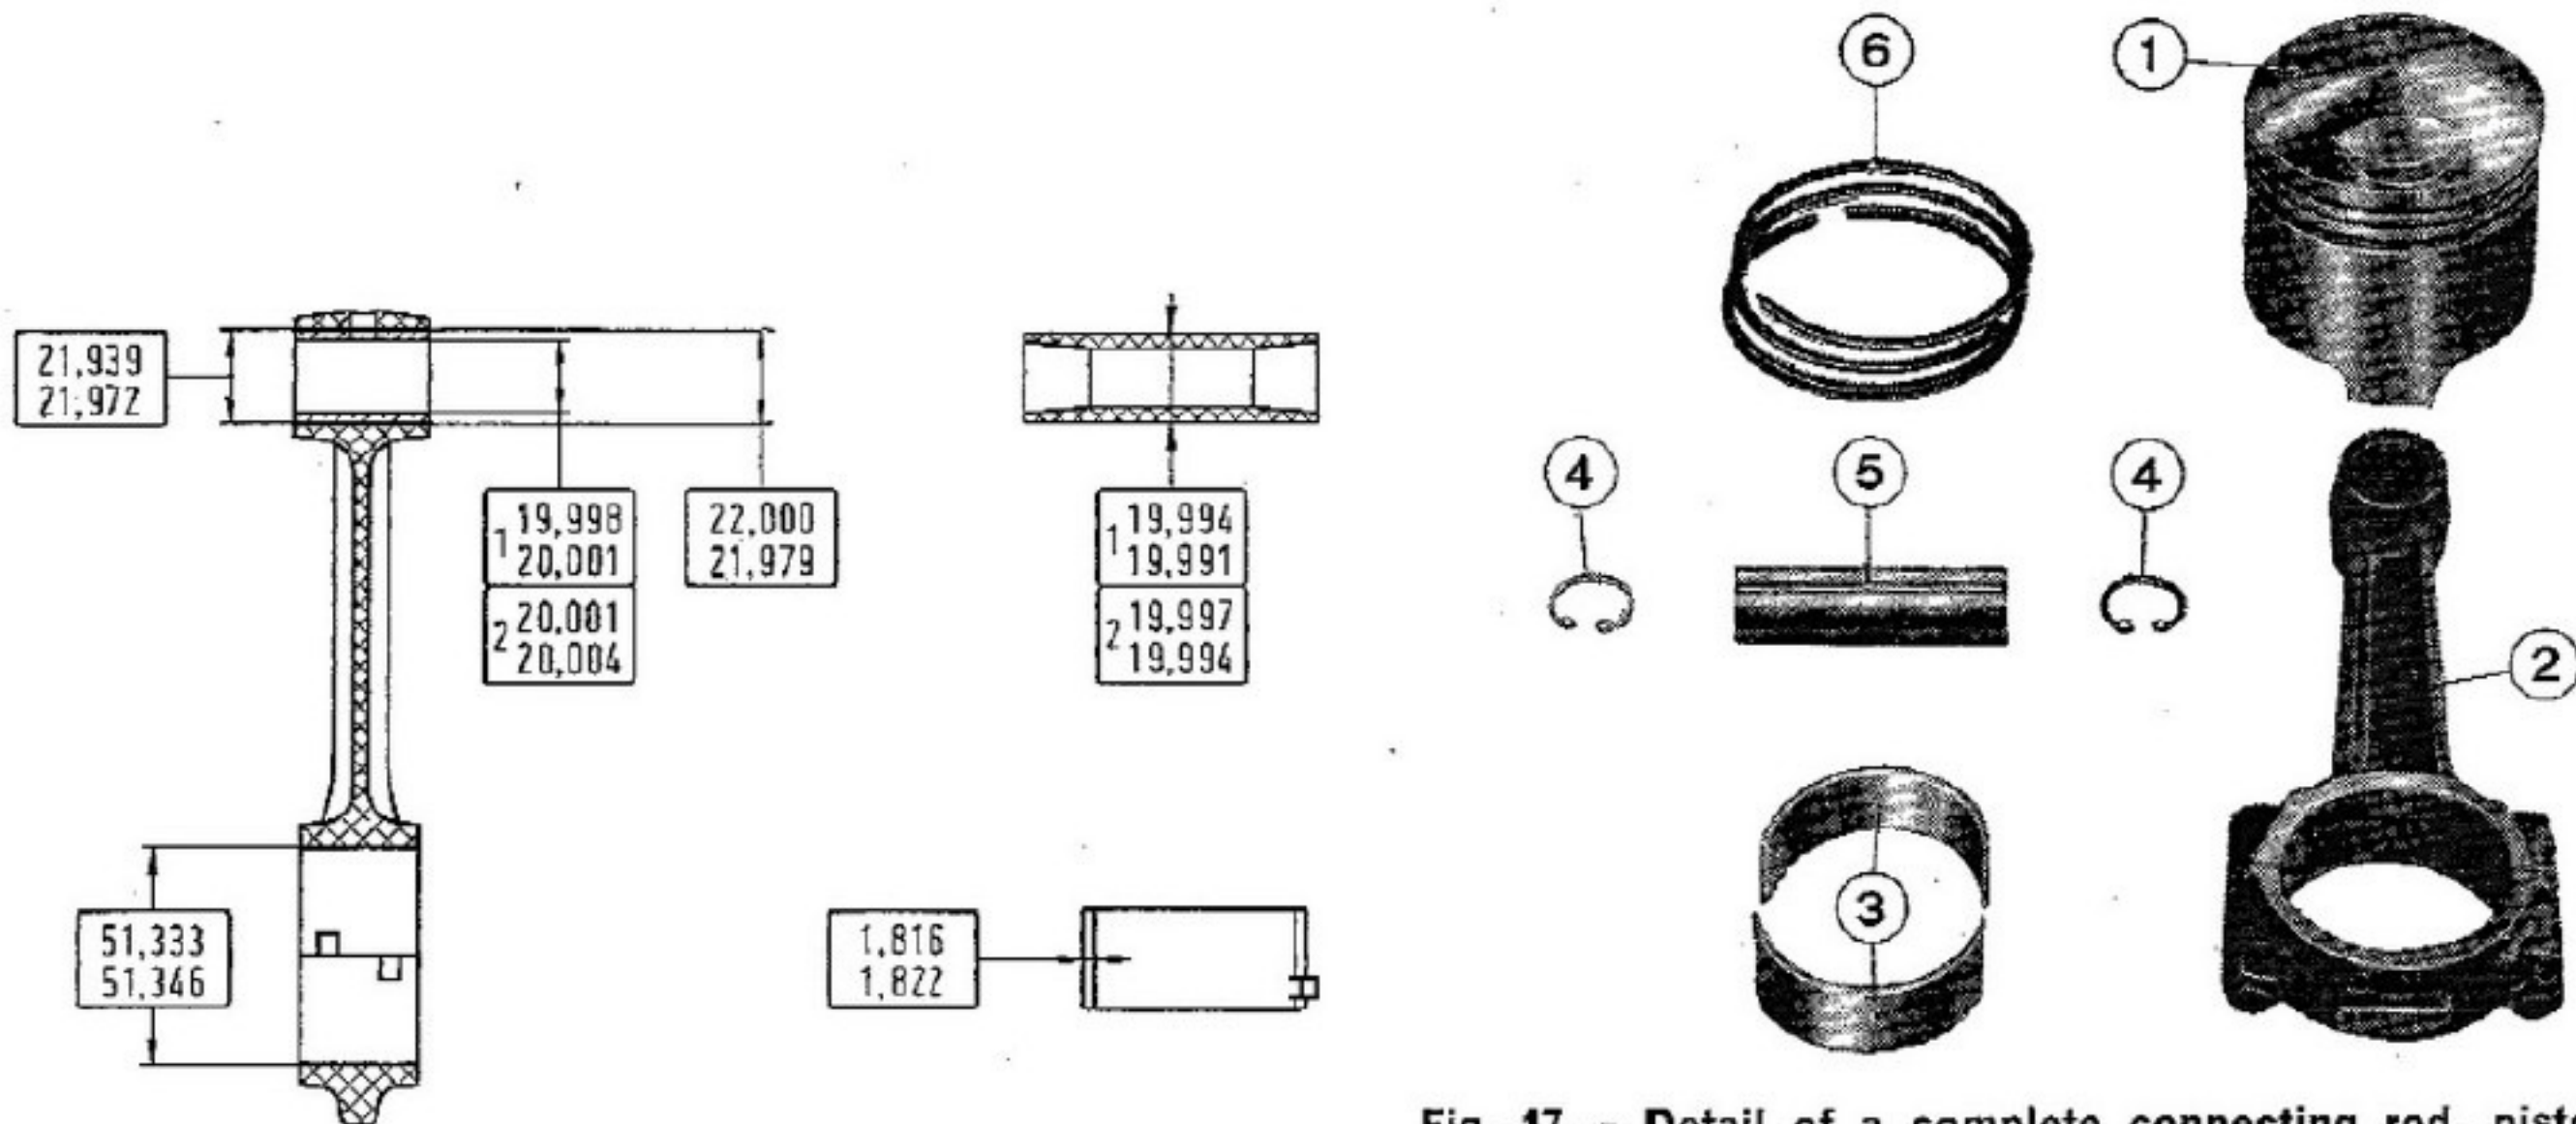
Detail of a complete connecting rod, piston and piston rings set.
